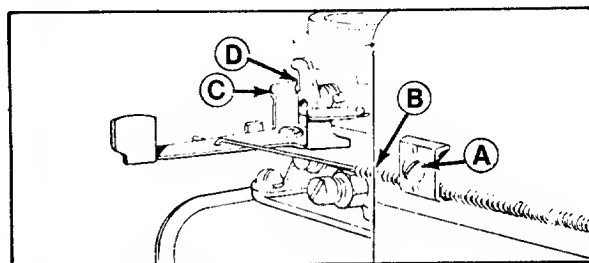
THROTTLE CONTROL ADJUSTMENT
